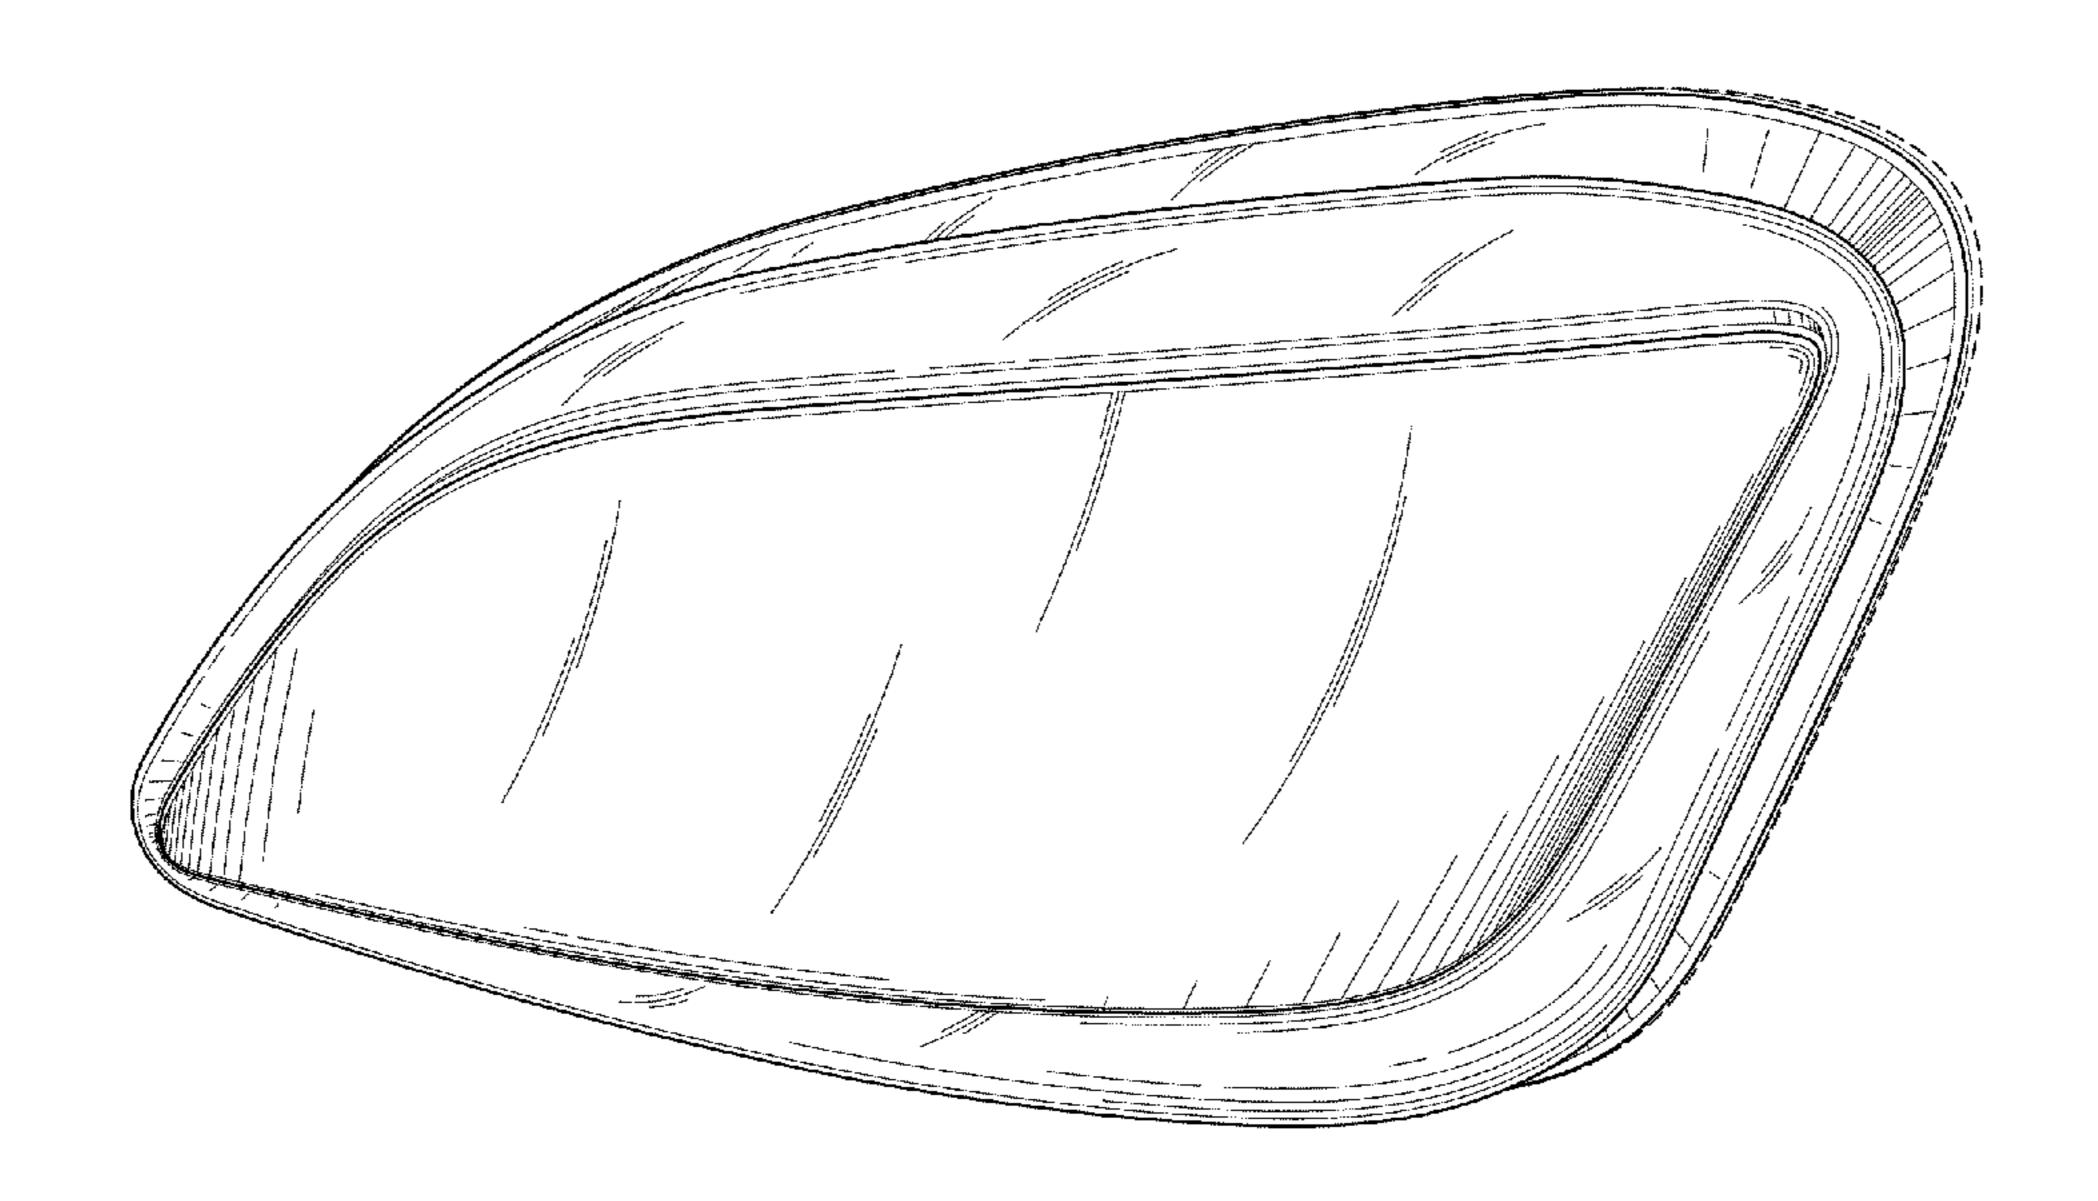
is a side view of the headlamp taken from the right side of FIG. 1.
